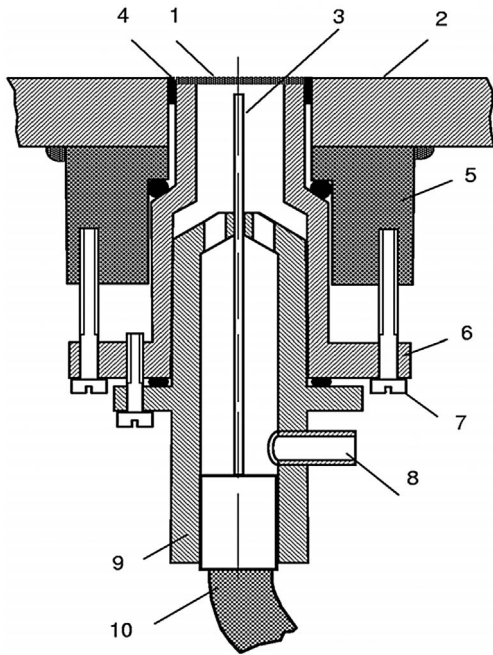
Sketch of the surface vibrator. 1 – membrane, 2 – model surface, 3 – displacement sensor tip, 4 – sealant, 5 – mounting, 6 – casing, 7 – adjustment screws, 8 – pneumatic pipe connector, 9 – mounting for fiber cable and pneumatic pipe, 10 – fiber cable.
